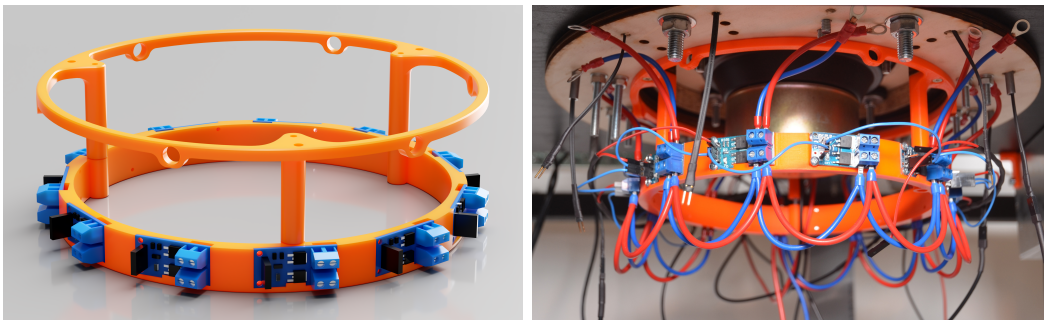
3D model rendering (a) and a photograph (b) of the PWM driver assembly.
